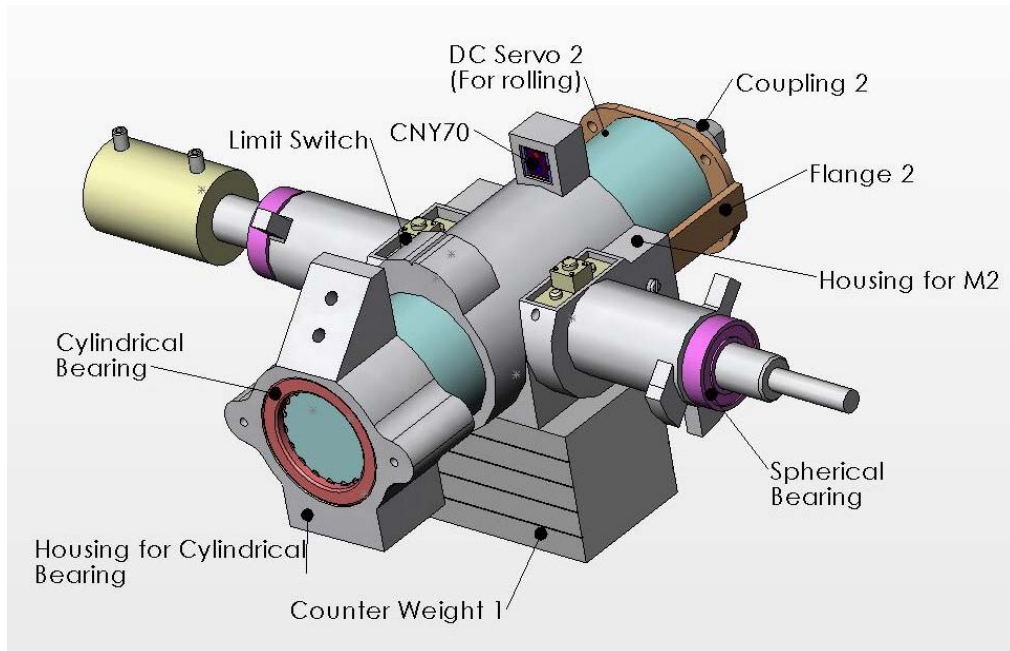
Assembly of the 2nd DOF of the Neck Mechanism
